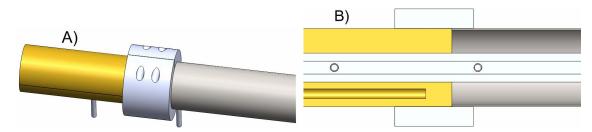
Clamping the parts together with a shaft collar. A) Outside view. B) Top view, cut horizontally.
